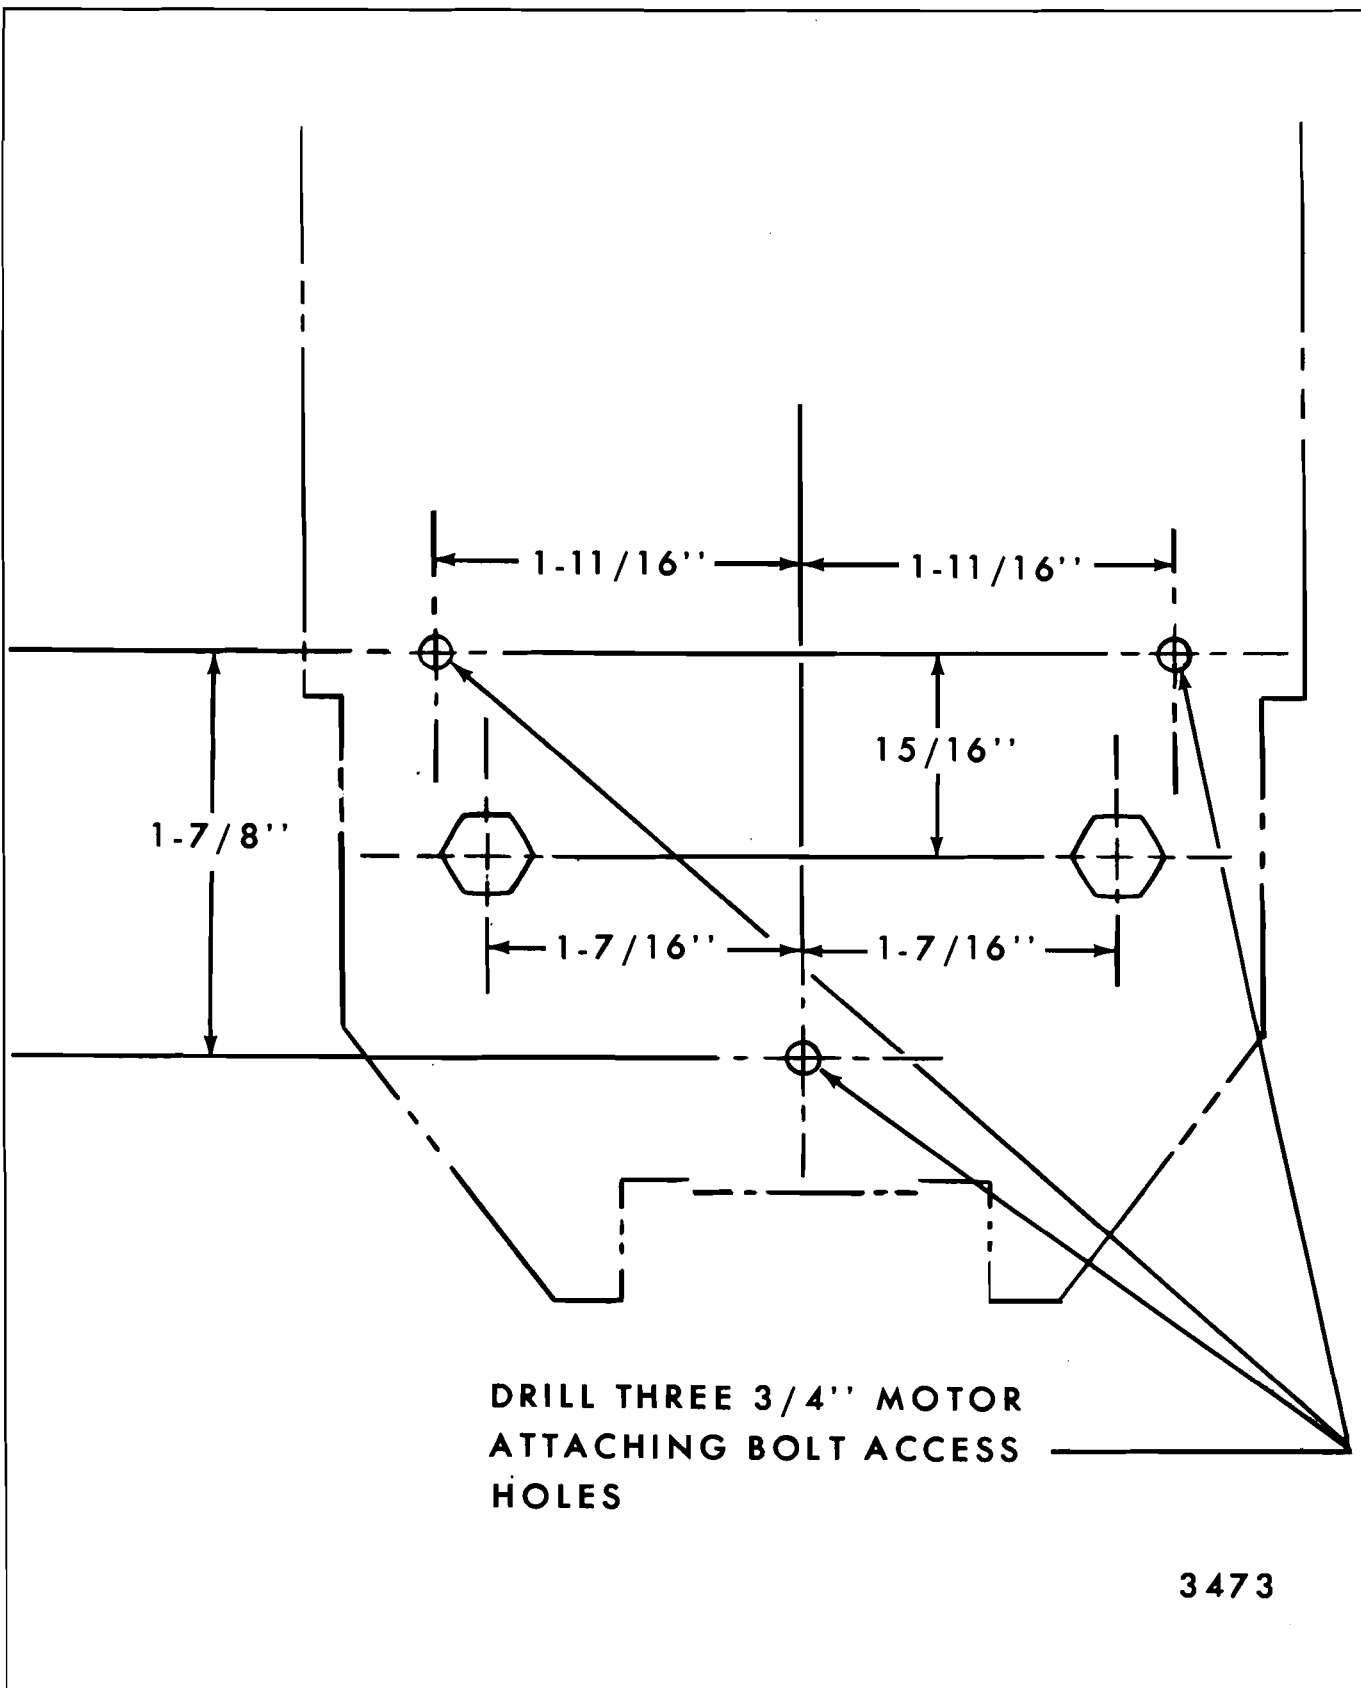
Window Regulator Lower Attaching Bolts (Reference Points for Locating Window Motor to Regulator Attaching Bolts) - "F-37, 67" Styles
